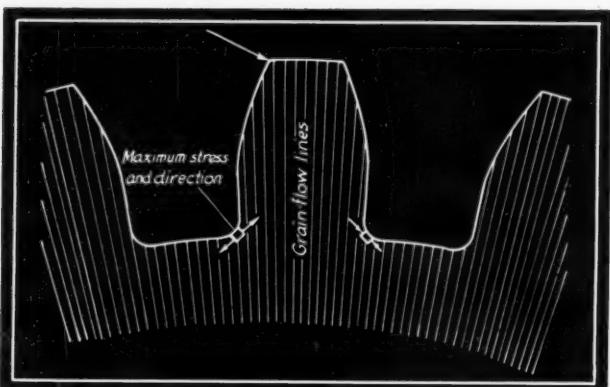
Direction of maximum bending stress in gear tooth fillet is not parallel to grain flow obtained by conventional upset forging methods
